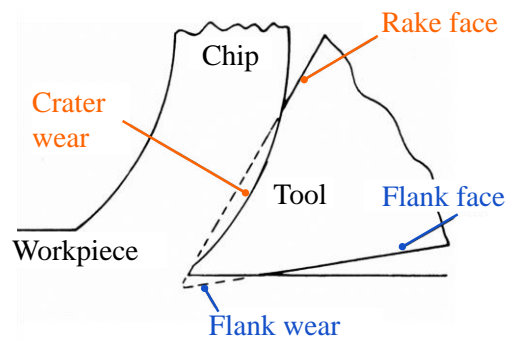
Most used forms to control tool wear (BOOTHROYD; KNIGHT, 2006).
